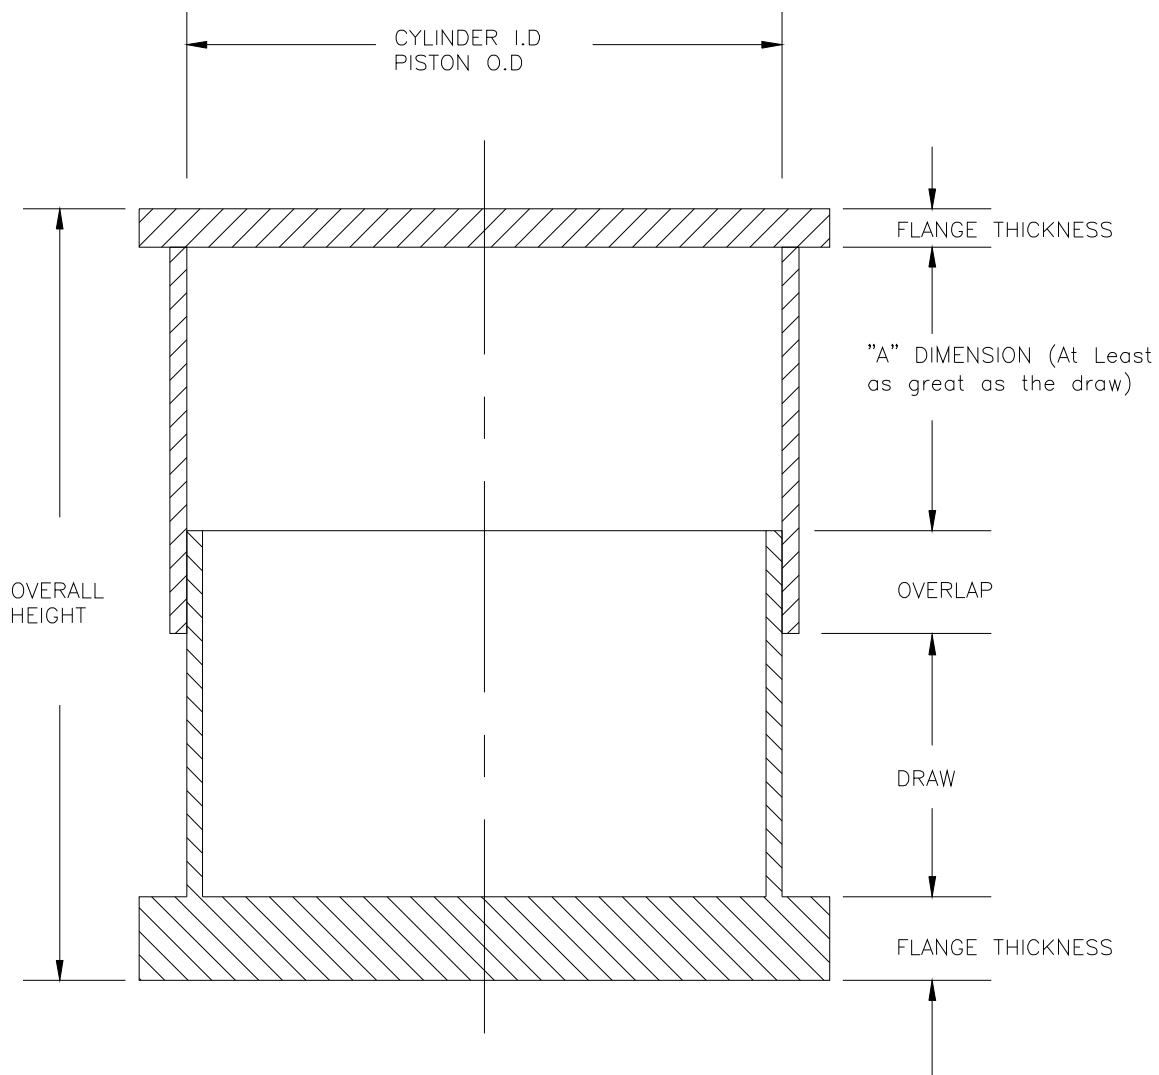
Basic dimensions of a model "C" die cushion
